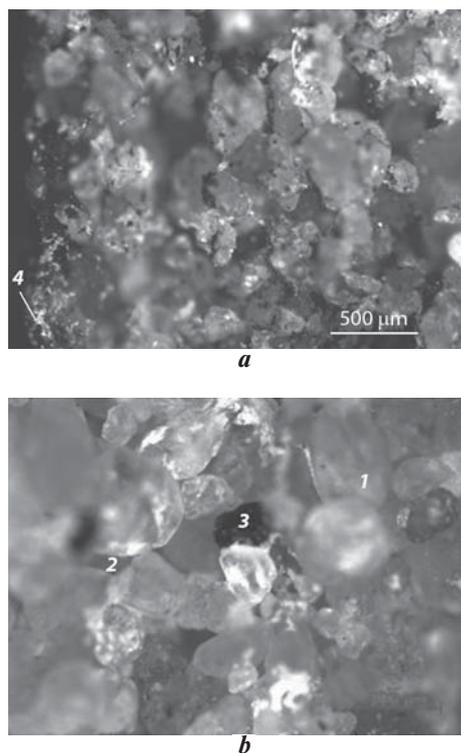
Burning-on (a) and burning-on thickness on casting surface (b)
